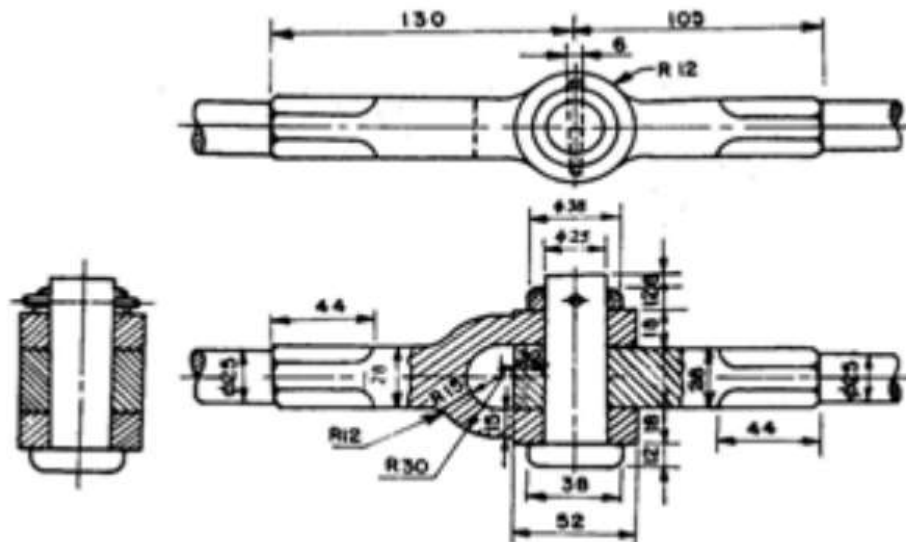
B: Knuckle Joint Parts with dimensions- Assemble Model
